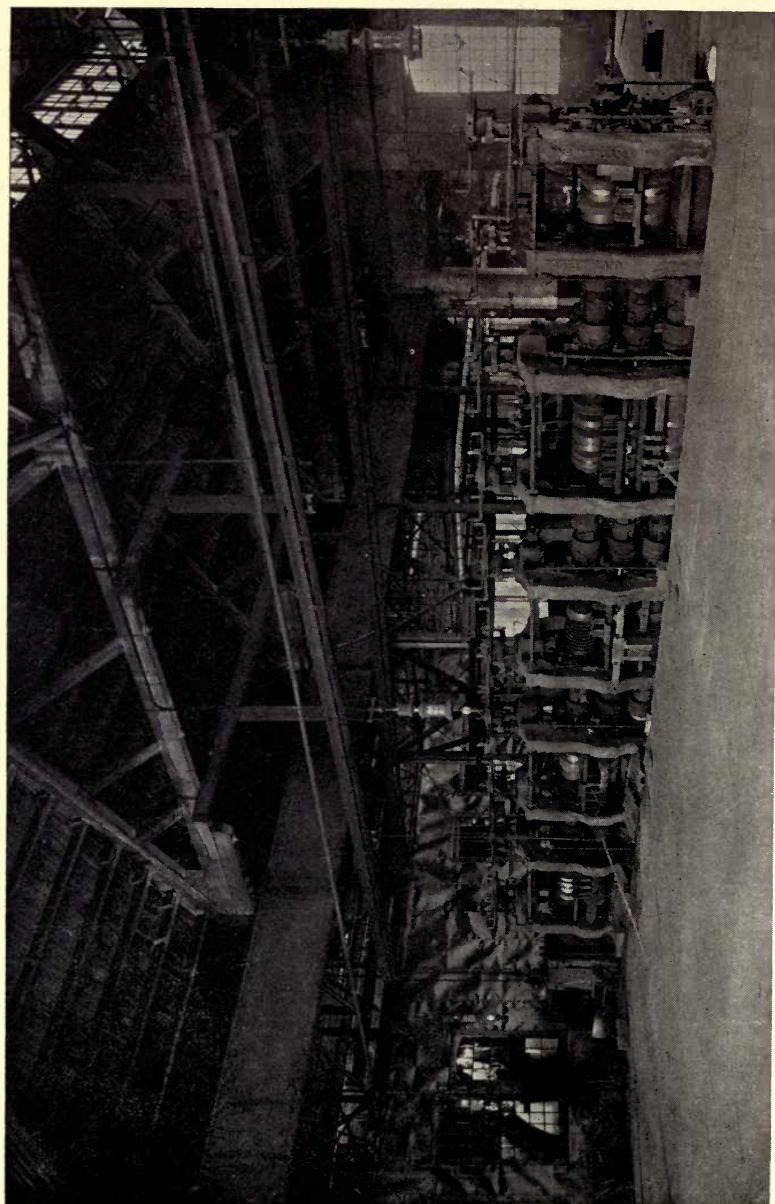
Motor-Driven, 20-inch Merchant Mill, Singer Mfg. Co., Elizabeth, N. J.
